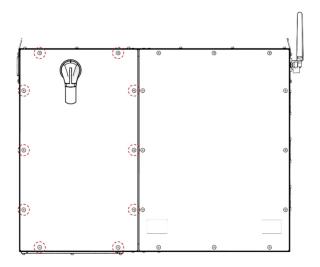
Wiring Box Cover Screws (Quantity 10)
